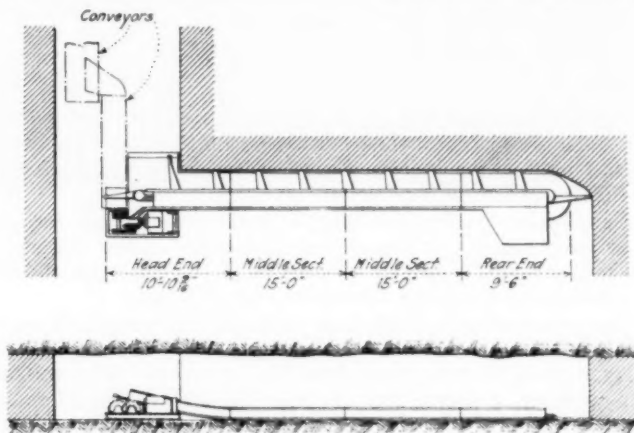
ASSEMBLY DIAGRAM OF TYPE D-2 MACHINE
